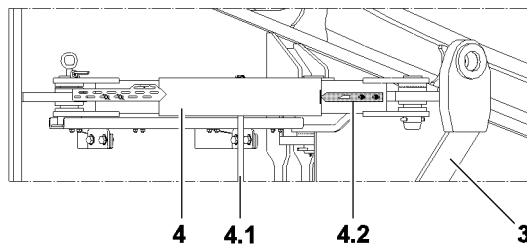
Adjustment of the adjustment sleeve on one half of the crawler carrier
